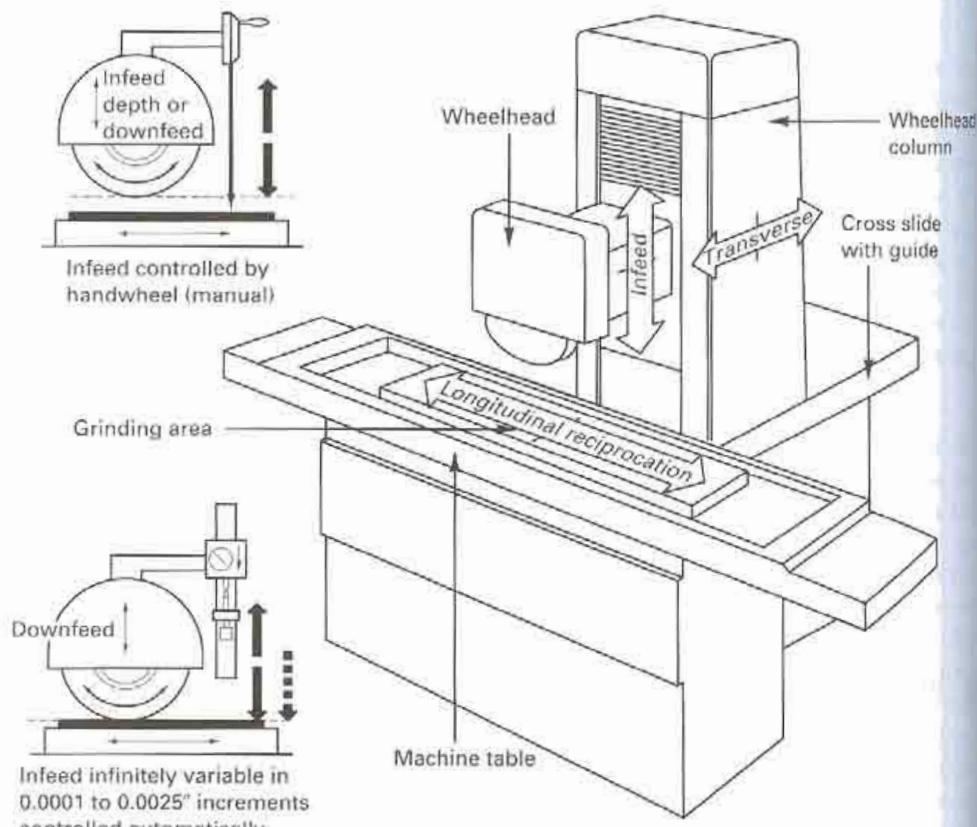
Horizontal-spindle surface grinder, with insets showing movements of wheelhead.
